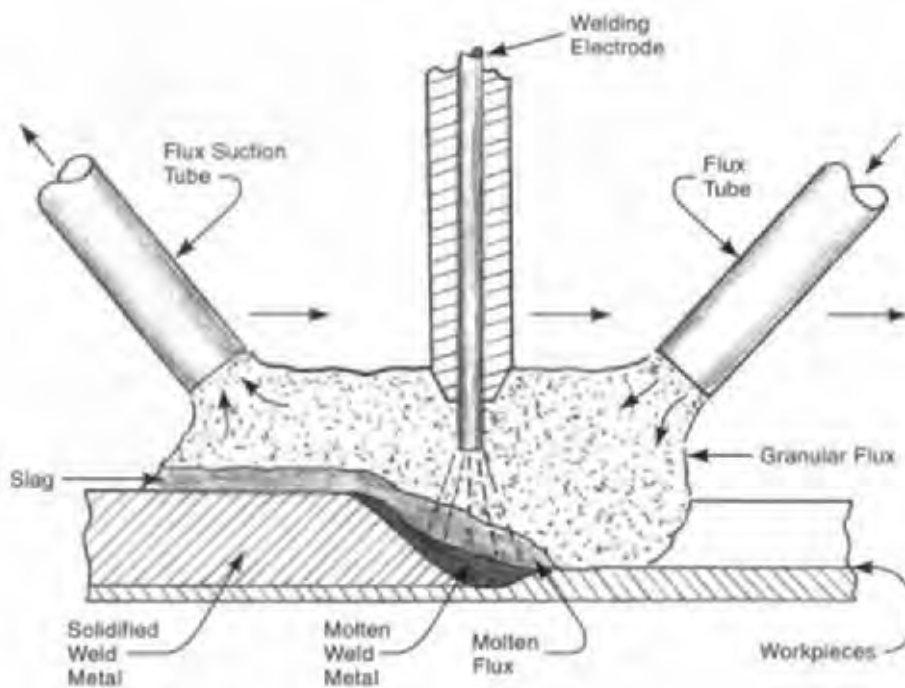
C1b Submerged arc welding (SAW). The weld seam is produced as the electrode and flux tubes move from left to right.
